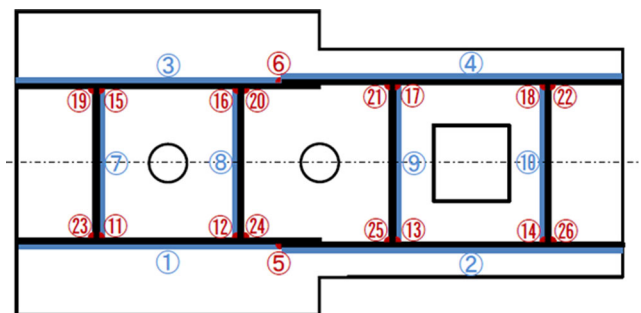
Welding line numbers ①~⑨ and welding sequence
